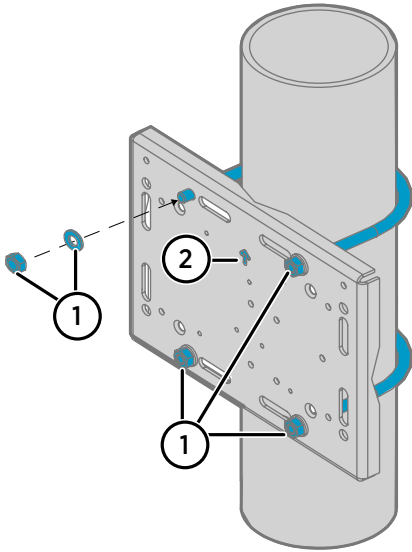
Attaching mounting plate to fixing brackets - vertical pole mounting
